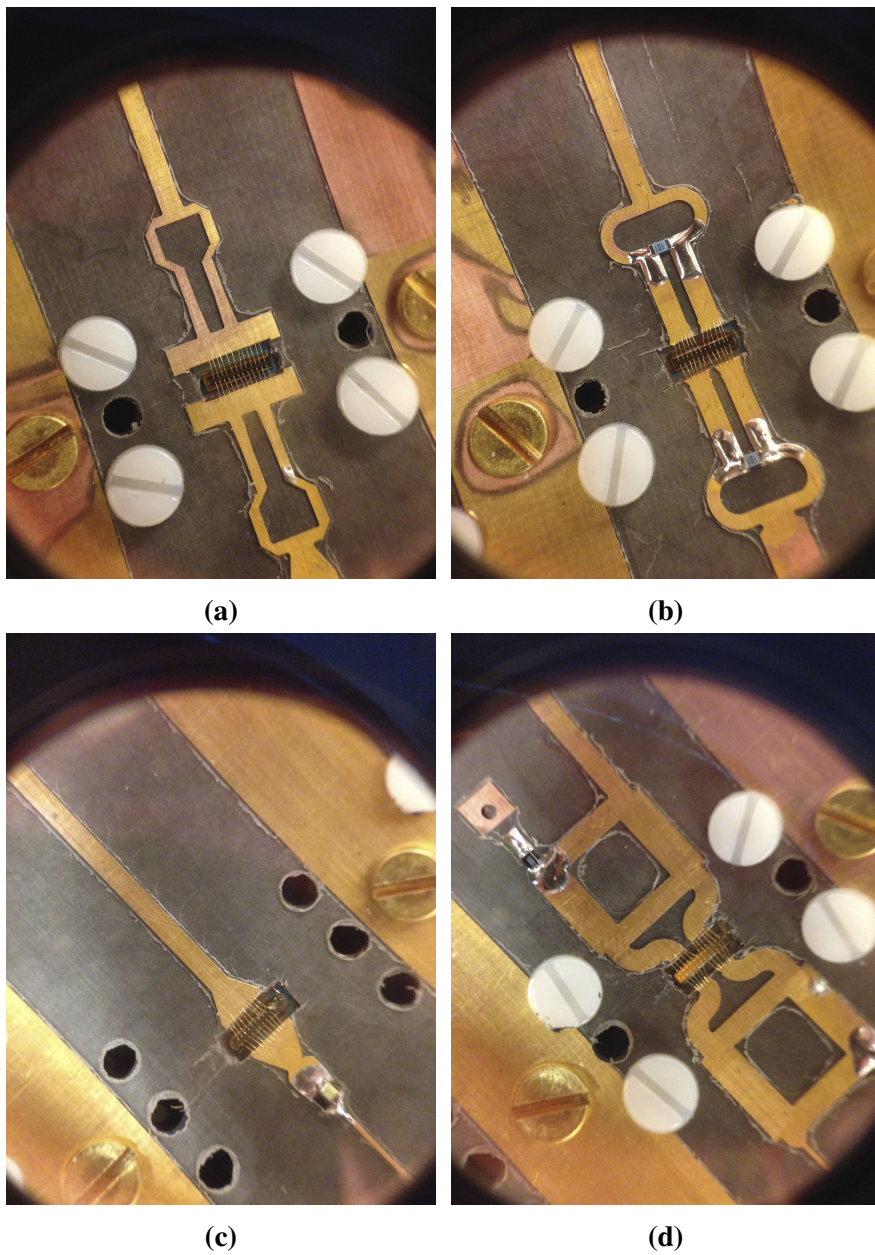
Close up of transistor and card showing lost details in layout due to the milling. (a): Bus-Bar design, (b): Wilkinson design, (c): Taper design, (d): Branch line coupler design
